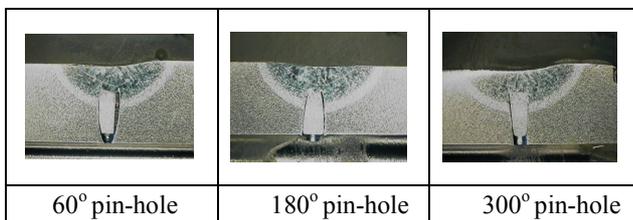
Macro-sections of the pin-hole welded specimens.
